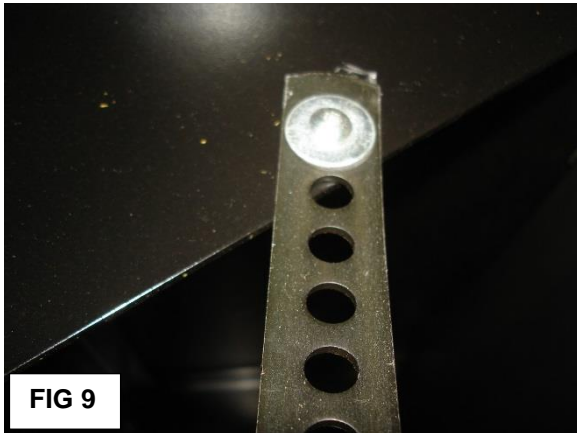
Attach the exhaust hanger strap to the outrigger using the screw/washer included in the kit. Use top hole position as shown. The Exhaust pipe should extend out past the side of the trailer approximately 2 inches and positioned so condensation will drain out.
